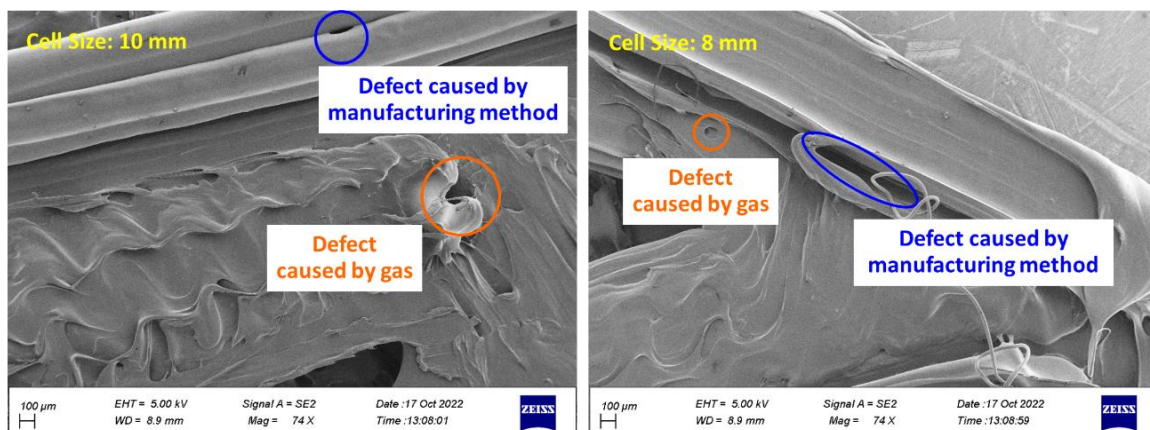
The defect fabricated on the surface of the sample during 3D printing
